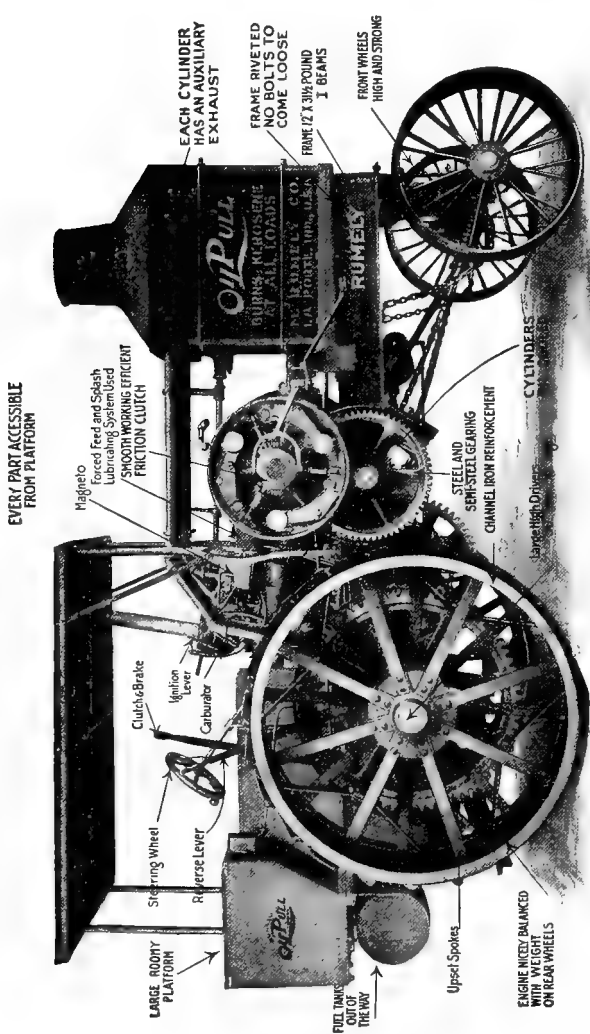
Assembly View of Oil Pull Gas Tractor, Showing Working Parts and Their Relation to Each Other.
